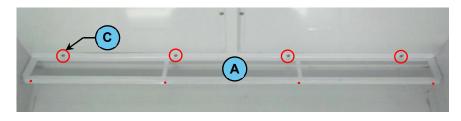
PG Back Wall Plenum Bottom Support Installed
